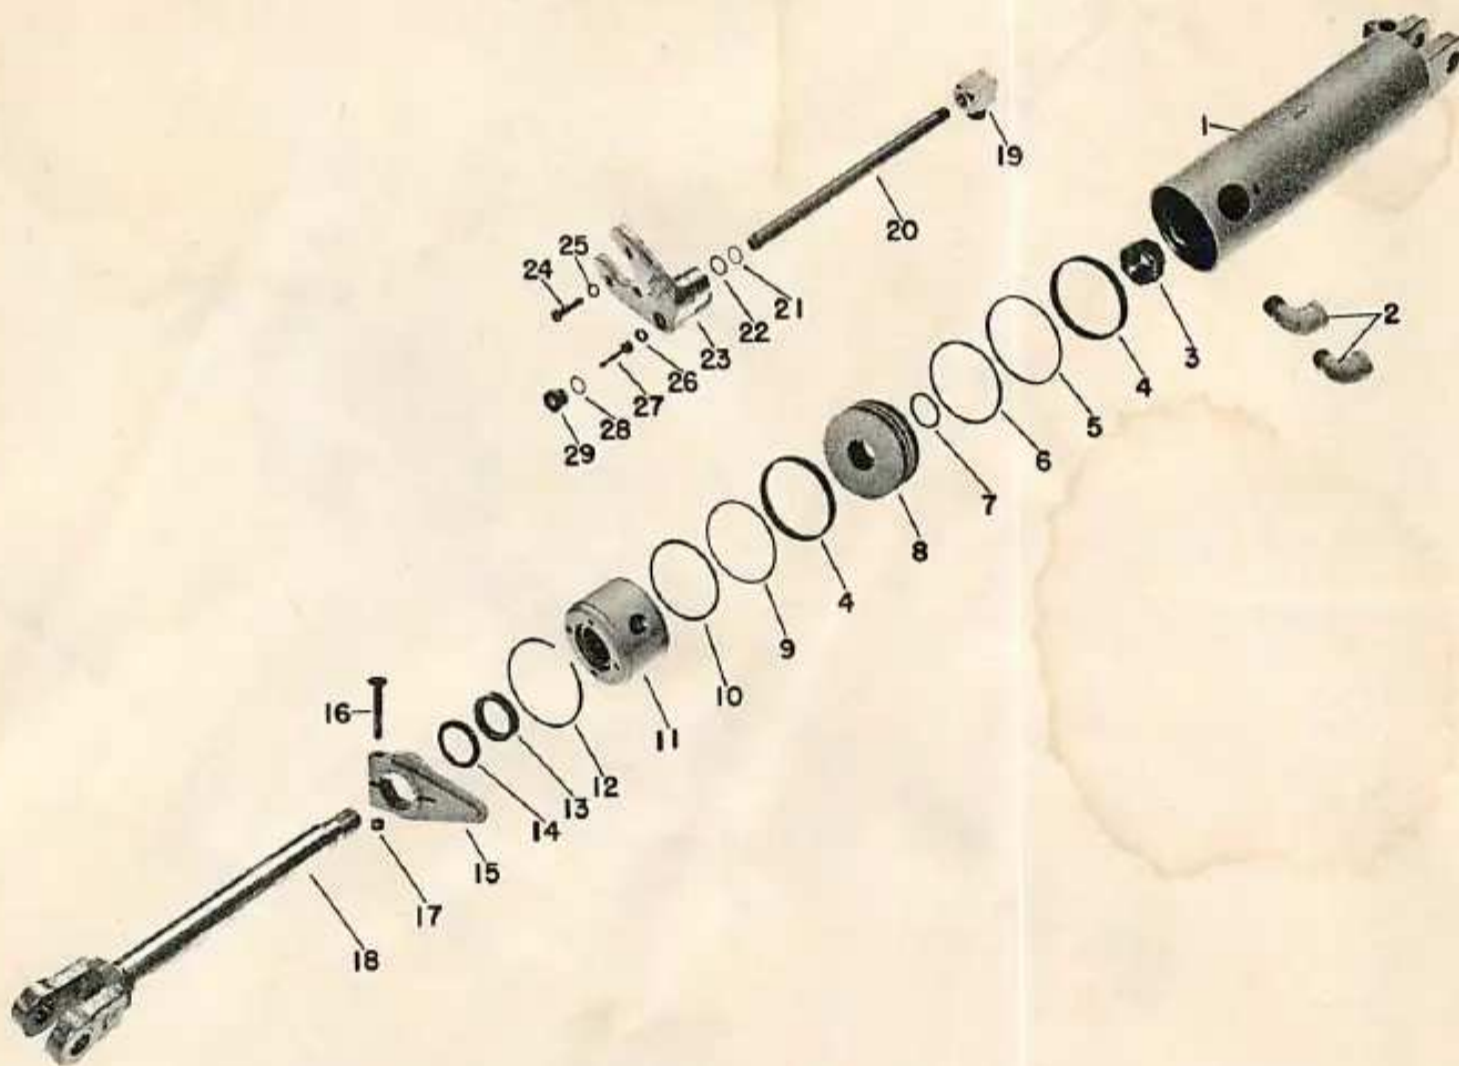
Exploded view of depth stop control cylinder. Stop arm (15) can be clamped in different positions on piston rod (18) to adjust length of cylinder stroke. When stop arm contacts valve (27), pressure build up in control valve opens poppet valve (21—Fig. O173) in valve spool releasing detent and allowing valve to return to neutral position.
